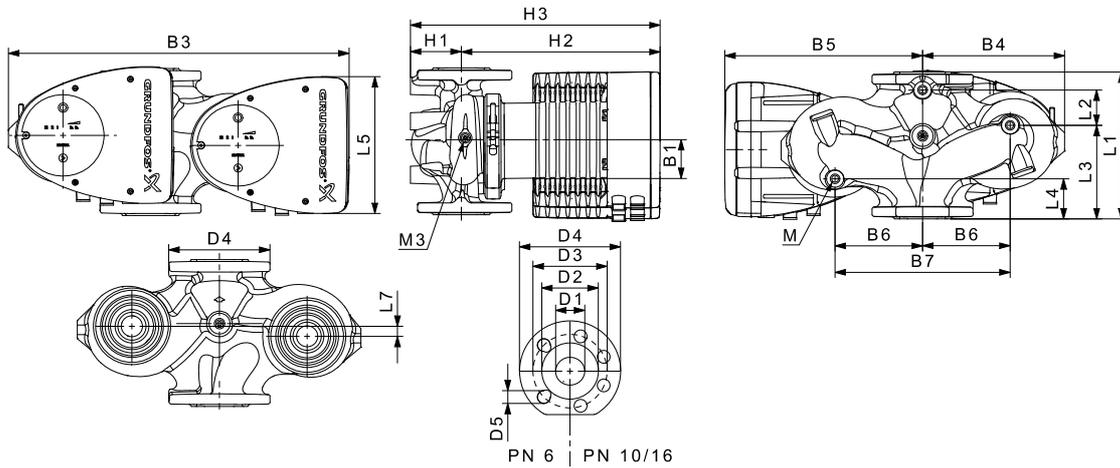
Twin-head pump dimensions, terminal-connected versions, flanged version
